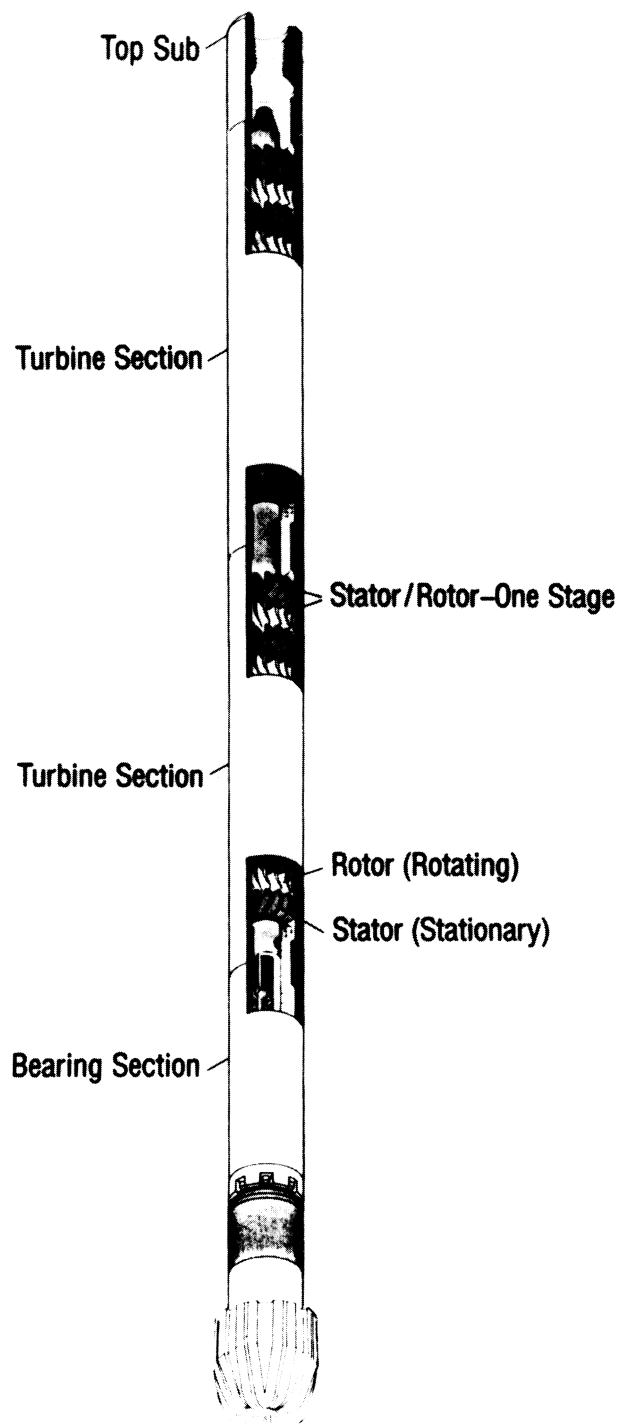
Typical turbine design (courtesy of Baker Tool Co.).
